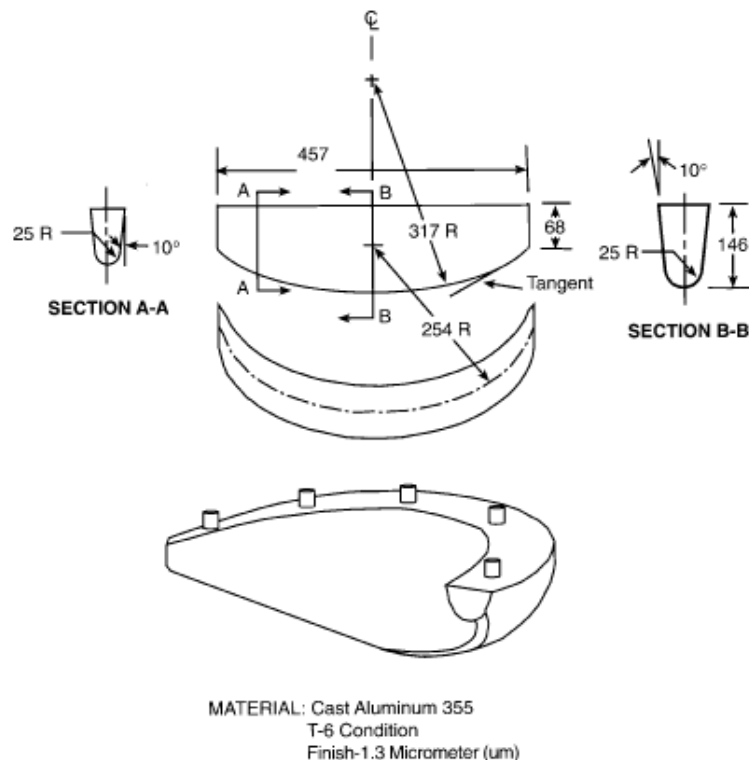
Diagram of Bead Unseating Block (all dimensions in mm)
